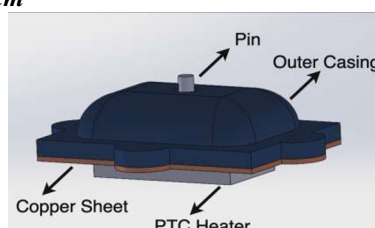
Parametric CAD Model of Heat Expansion Type System
